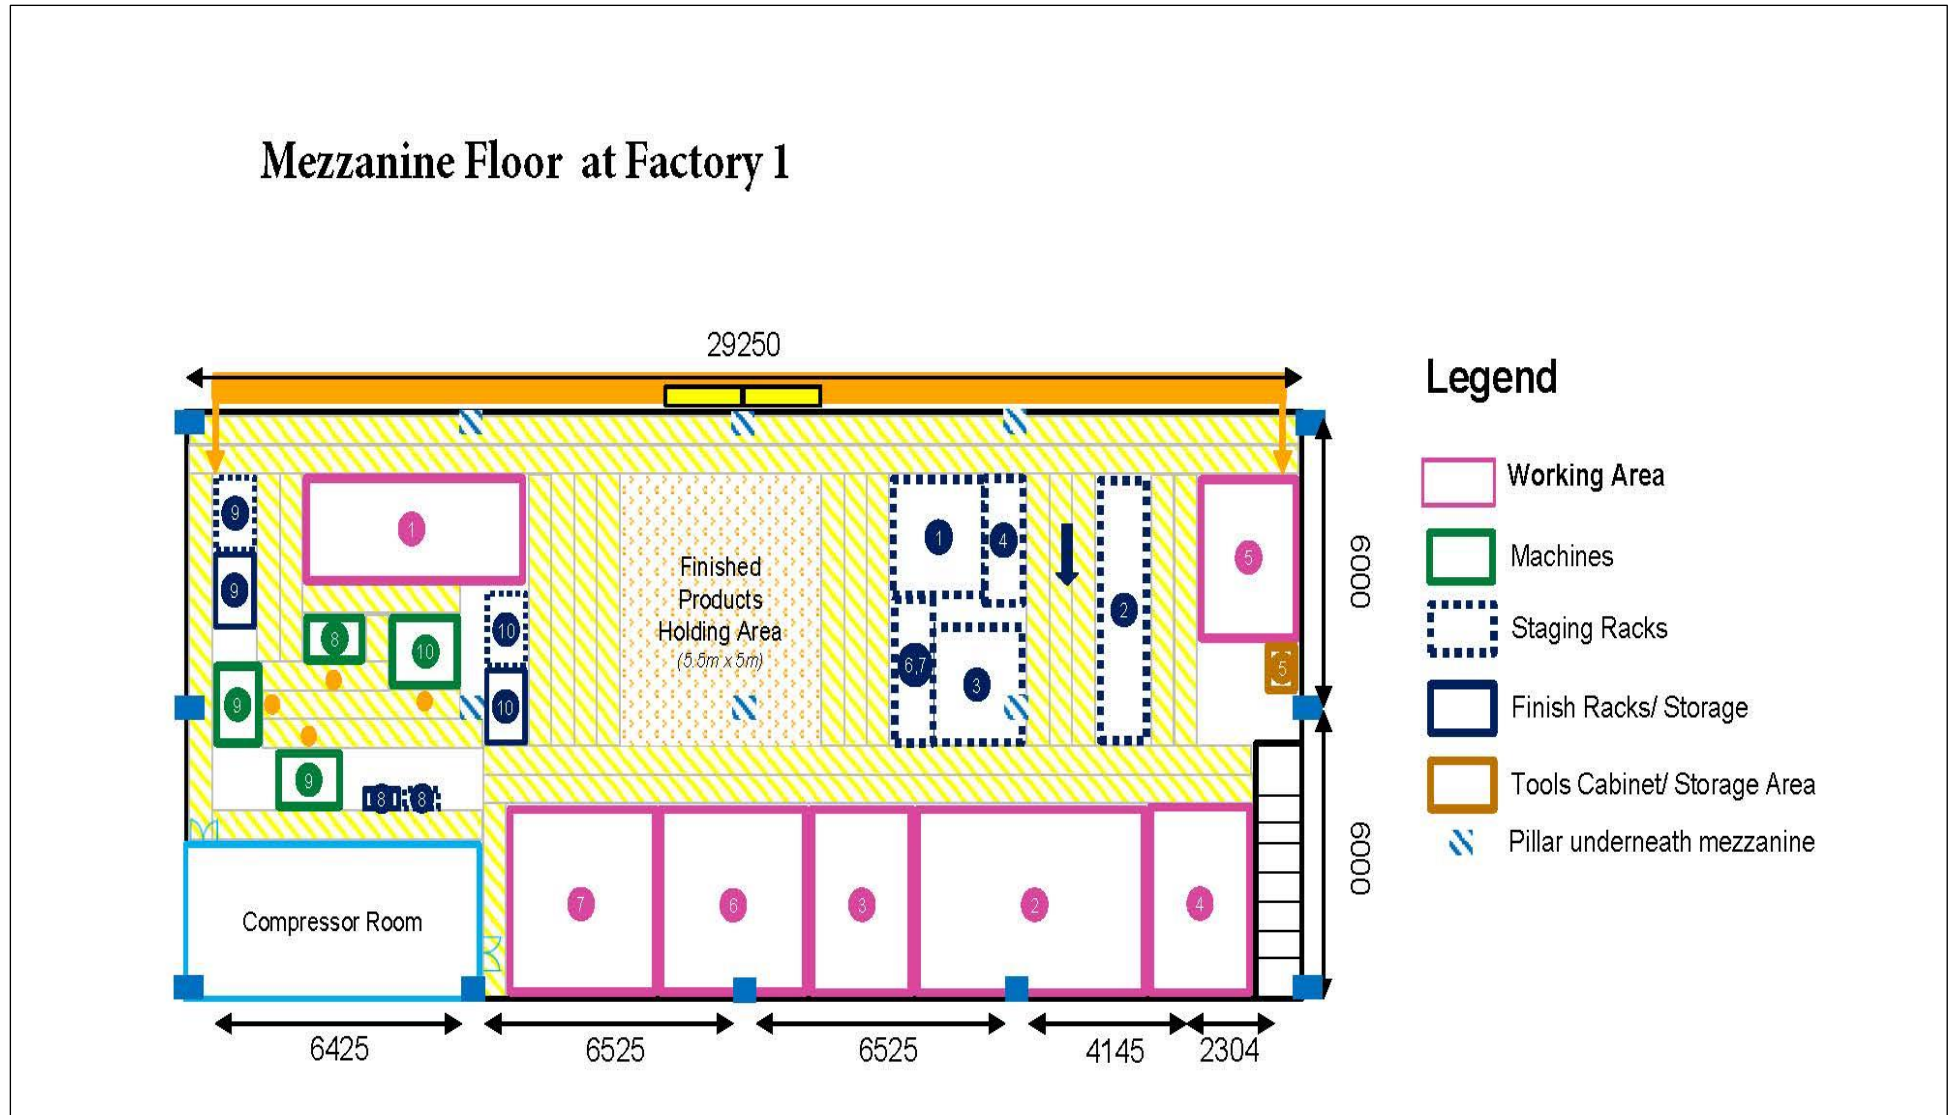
Machine Layout Plan of Mezzanine Floor at Factory 1
